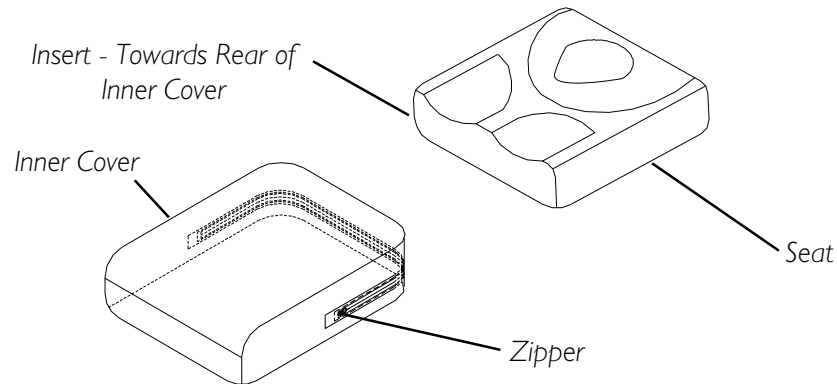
REMOVING/INSTALLING SEAT COVERS - INNER COVER
